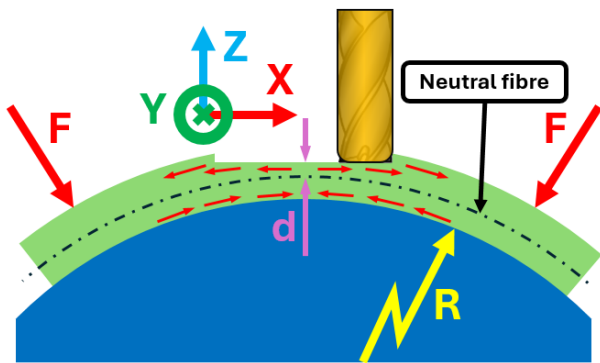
Stresses introduced by bending loads for slender workpiece machining.
